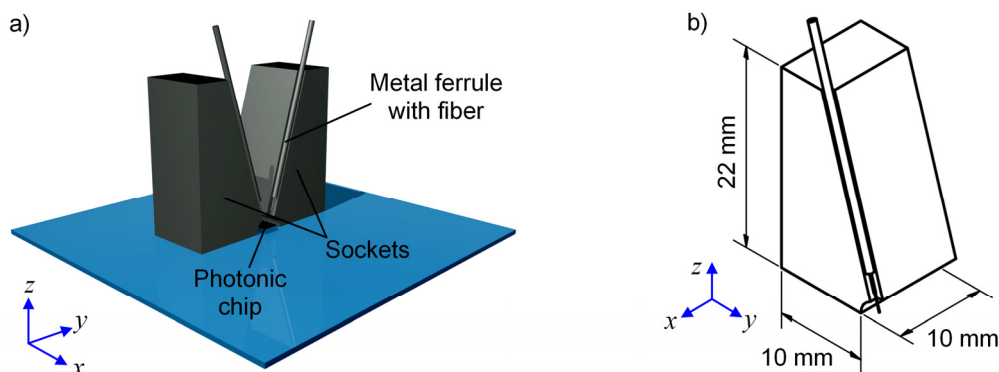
Overview of an alternative design of a socket for an out-of-plane fiber-to-chip coupling arrangement. The assembly of the arrangement a) is identical to the initial design presented in Figure 6.2. b) Excerpt of the technical drawing of a socket with flat-polished bottom surface.
